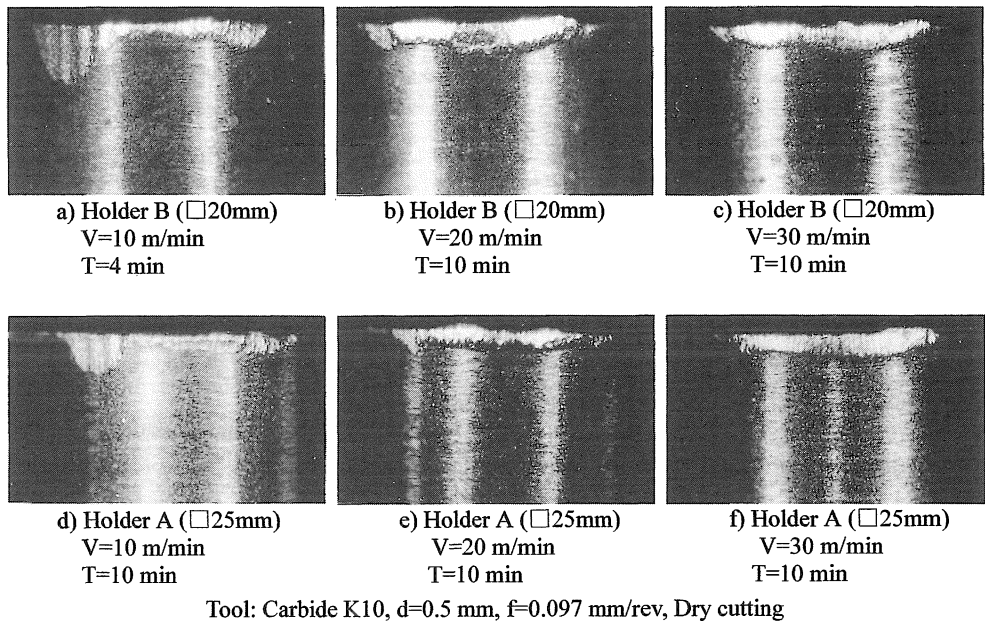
Effect of tool holder stiffness on tool wear of carbide k10 in machining of 13Cr sprayed material
